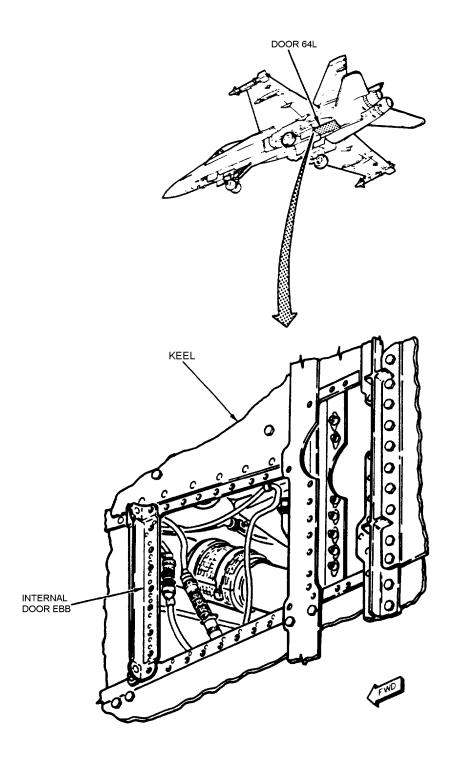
Vent Tank Cavity Bulkhead Fittings and Supports (Sheet 3)
